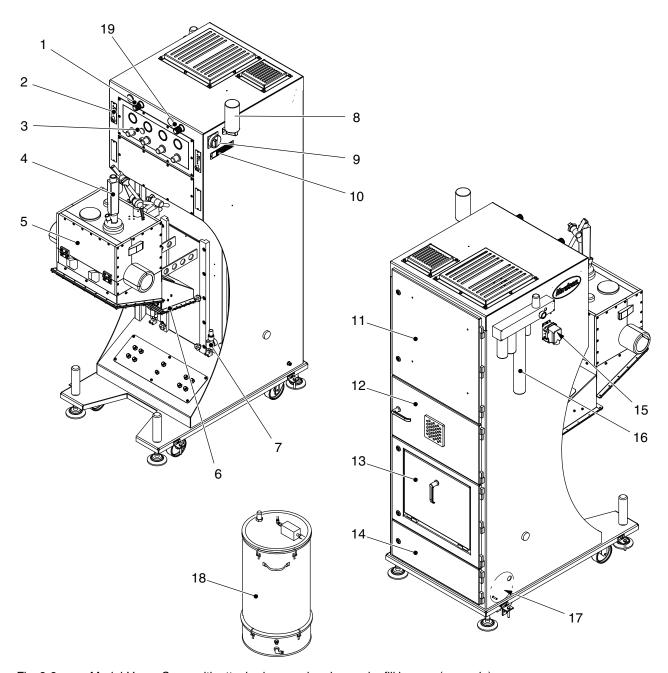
Model *Versa-Spray* with attached spray chamber and refill hopper (example)
